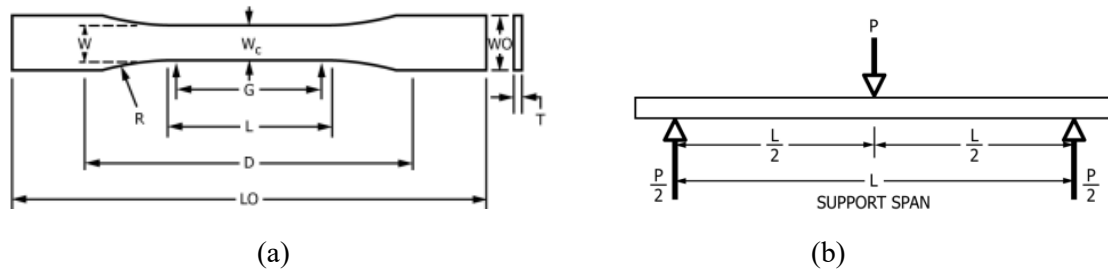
(a) Tensile specimen geometry in agreement with ASTM D638.14 standard and (b) Flexural specimen geometry in agreement with ASTM D7264/D7264m-21
